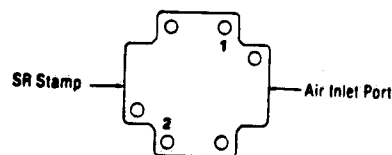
SOCKET-HEAD CAPSCREW LOCATIONS.
